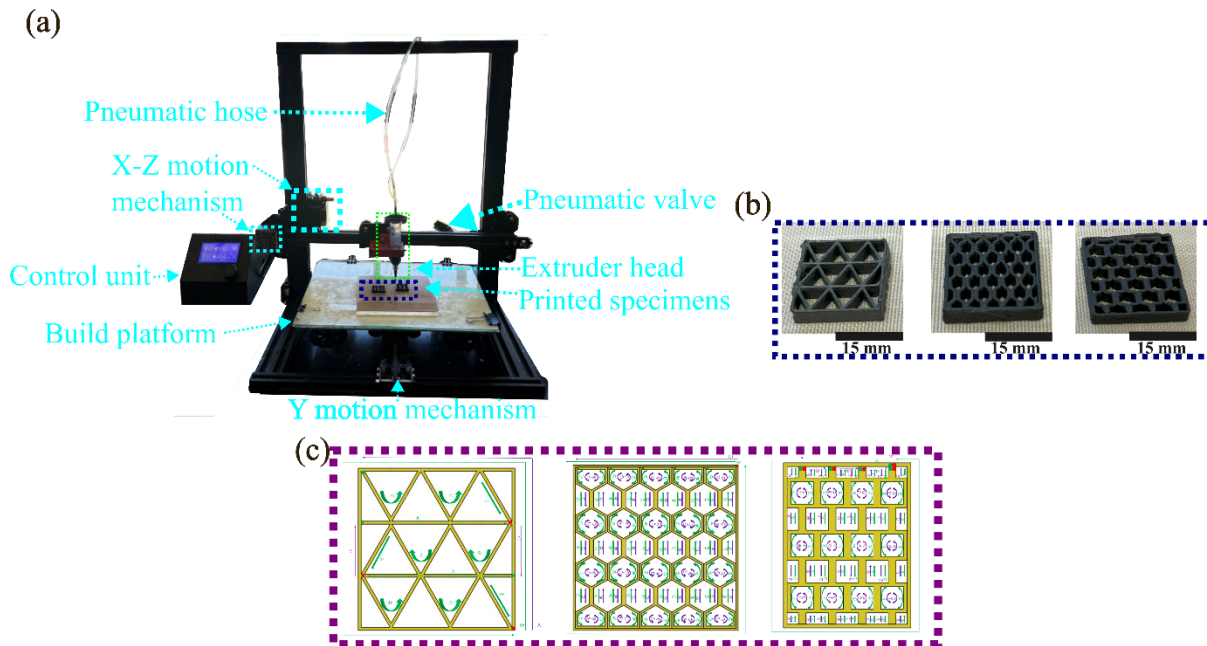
1. DIW printing setup for short carbon fiber-reinforced honeycomb composite structures: (a) modified DIW printer setup, (b) sample prints of triangular, hexagonal, and square honeycomb structures having infill 40%, and (c) layer-wise print path design for the honeycomb composite structures.
